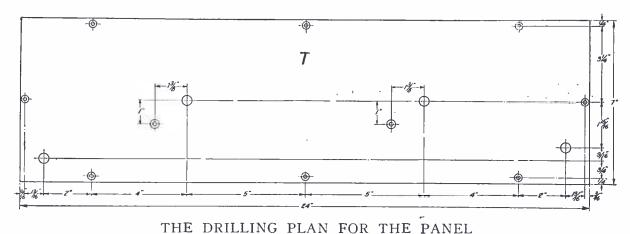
Where to drill the holes for mounting the instruments. The holes outlined with a double circle should be countersunk. Always start drilling holes in the panel with a small drill; one-sixteenth inch is a desirable size.
